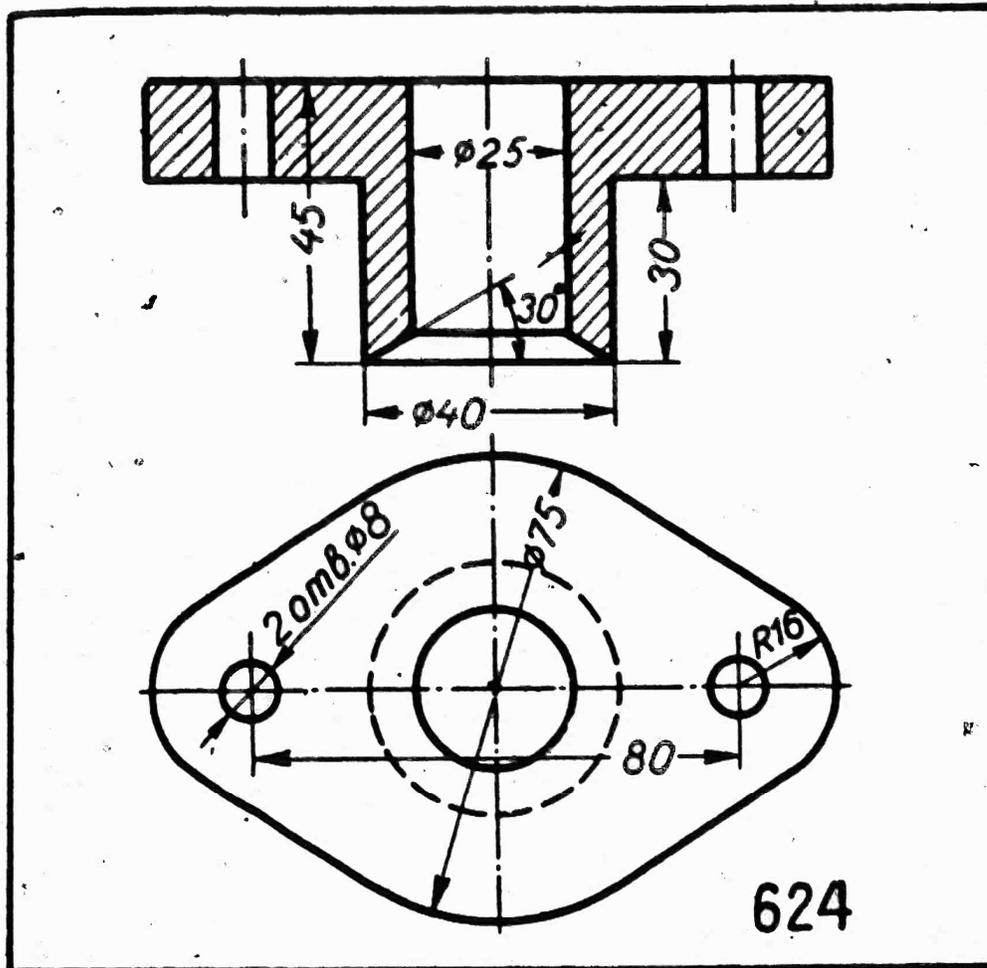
An example of a problem in "how to read a technical drawing."
